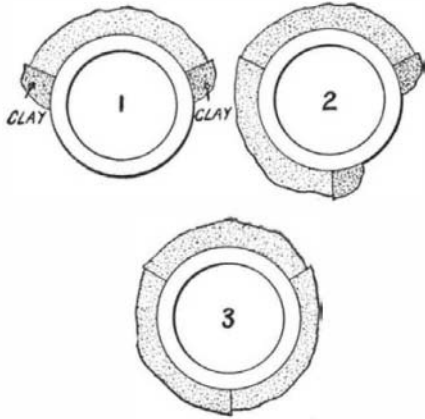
SUCCESSIVE STEPS IN MAKING THE OUTSIDE MOLD.
